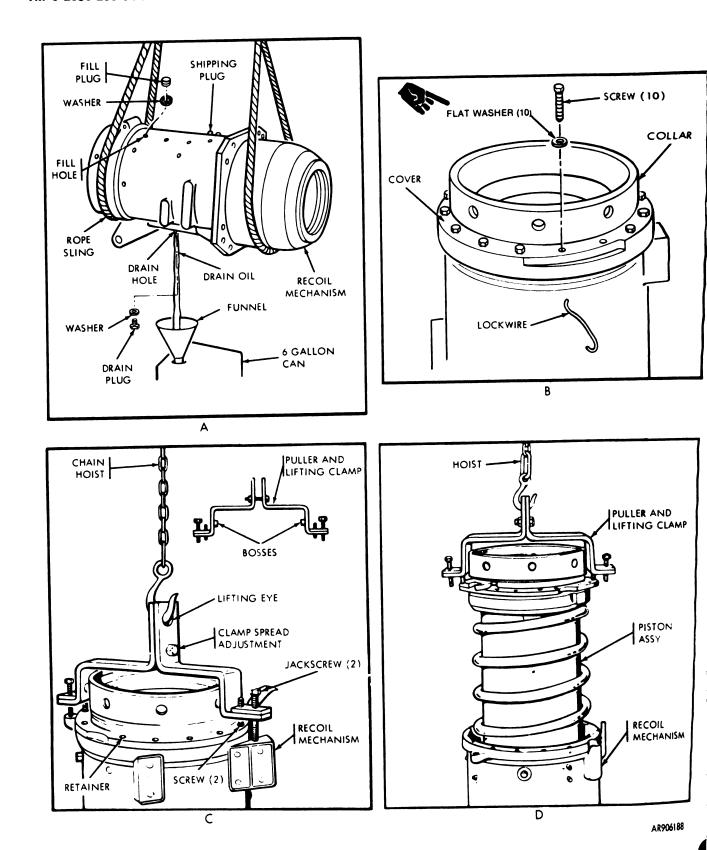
Recoil mechanism disassembly or assembly (1 of 5).
